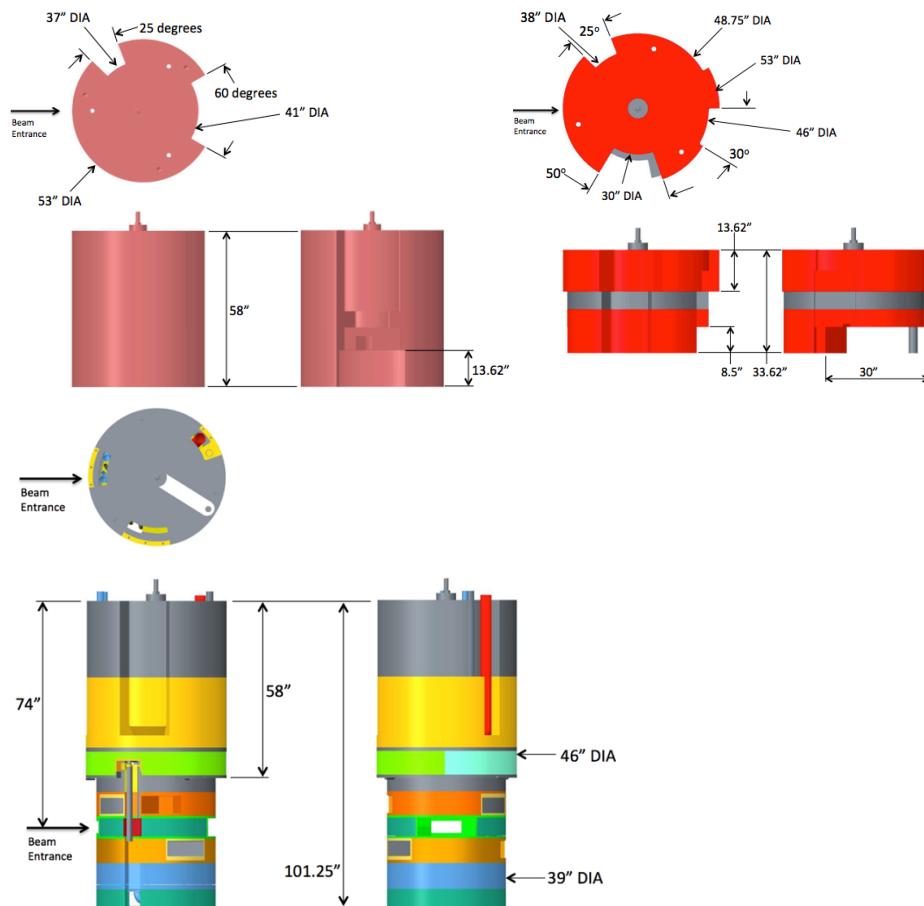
IRP segment with the dimensions (inches). Top row from left to right: top segment, middle segment. Bottom row - lower segment, Dimensions are in inches.
